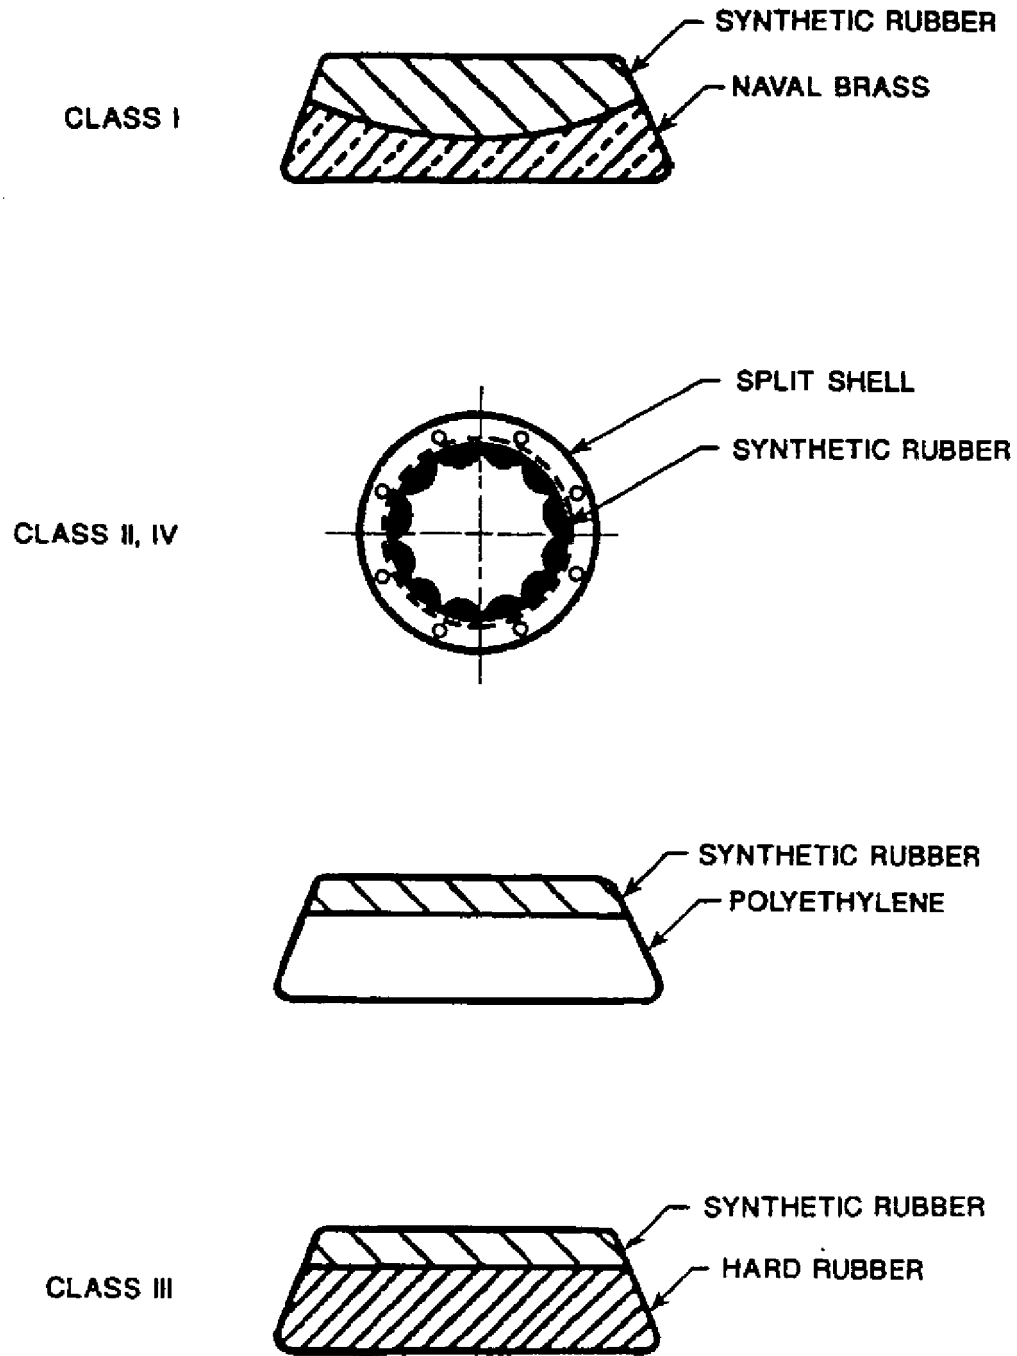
Classes of Stern Tube and Strut Bearings
